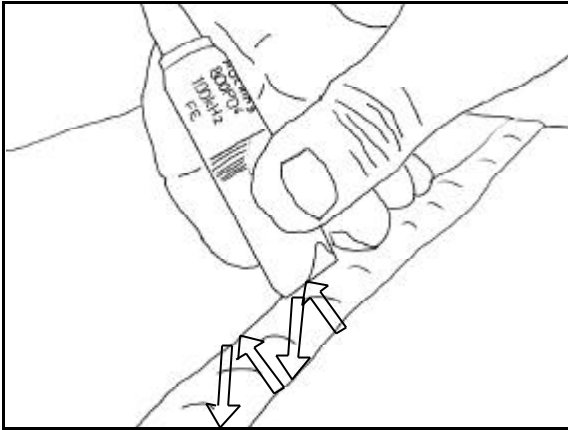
A - Scan of Weld Cap (dressed weld)
